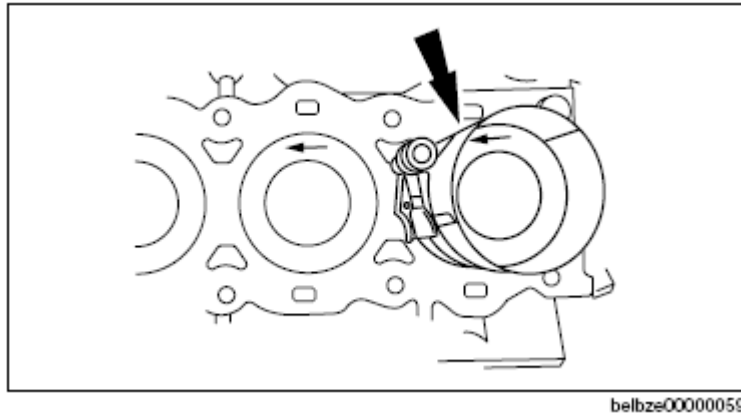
Inserting Piston And Connecting Rod Into Cylinder With Arrow Mark To Front Of Engine
